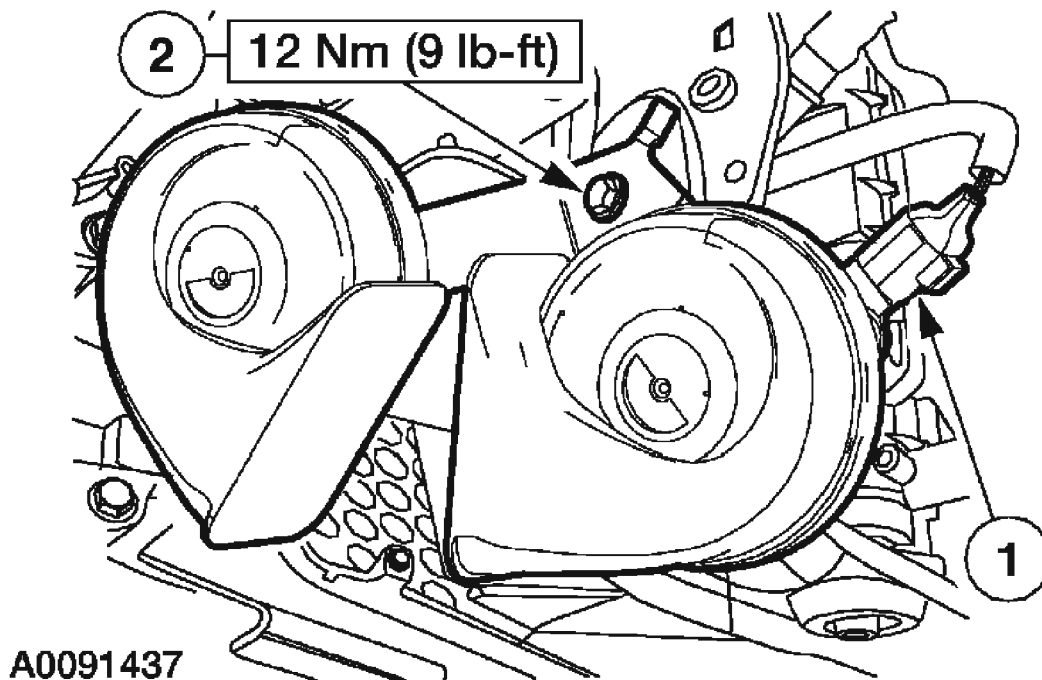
Disconnecting Electrical Connector, Removing Bolt And Horn
